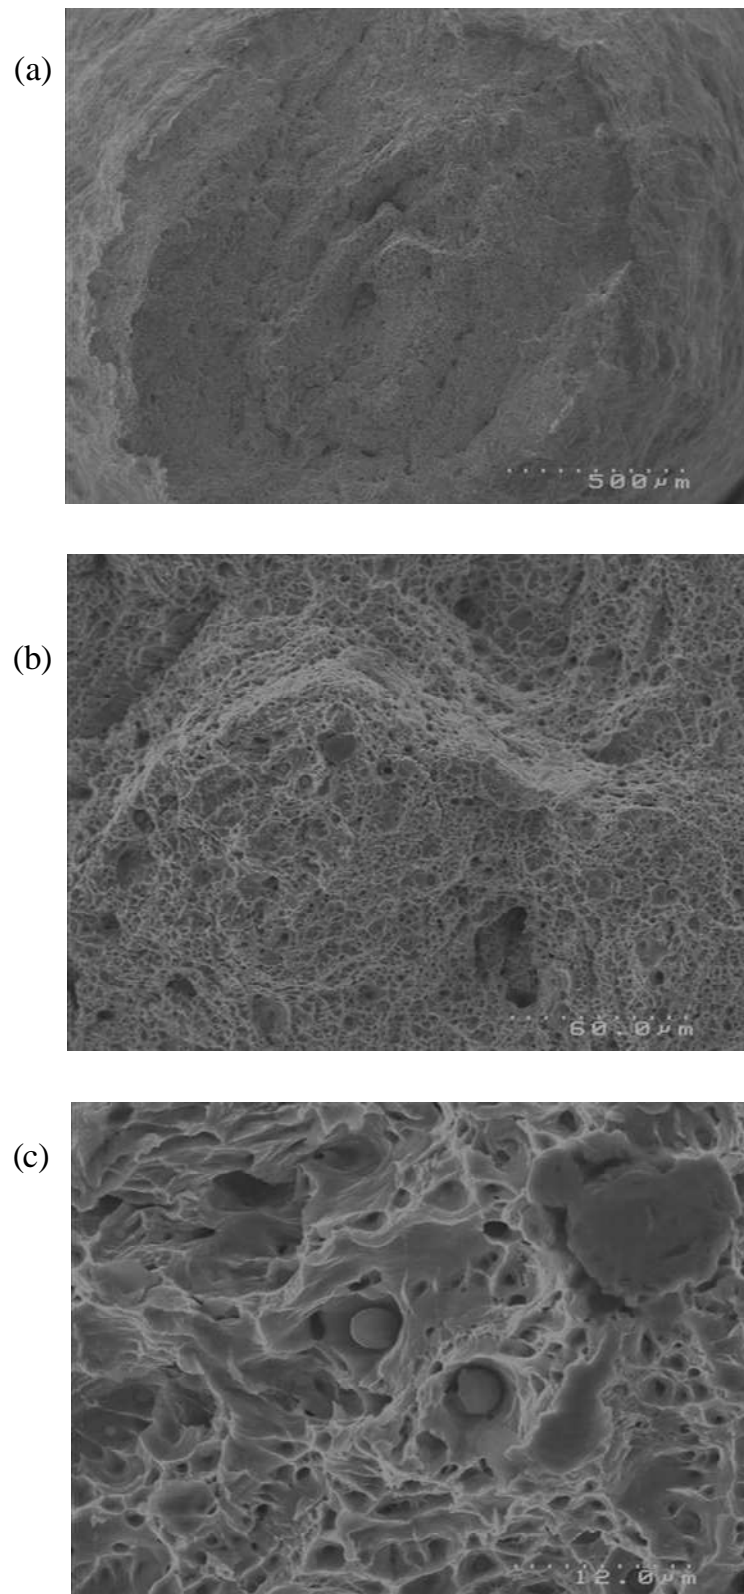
Typical fracture surface of tensile specimen for the RH weld metal tested at 20°C
